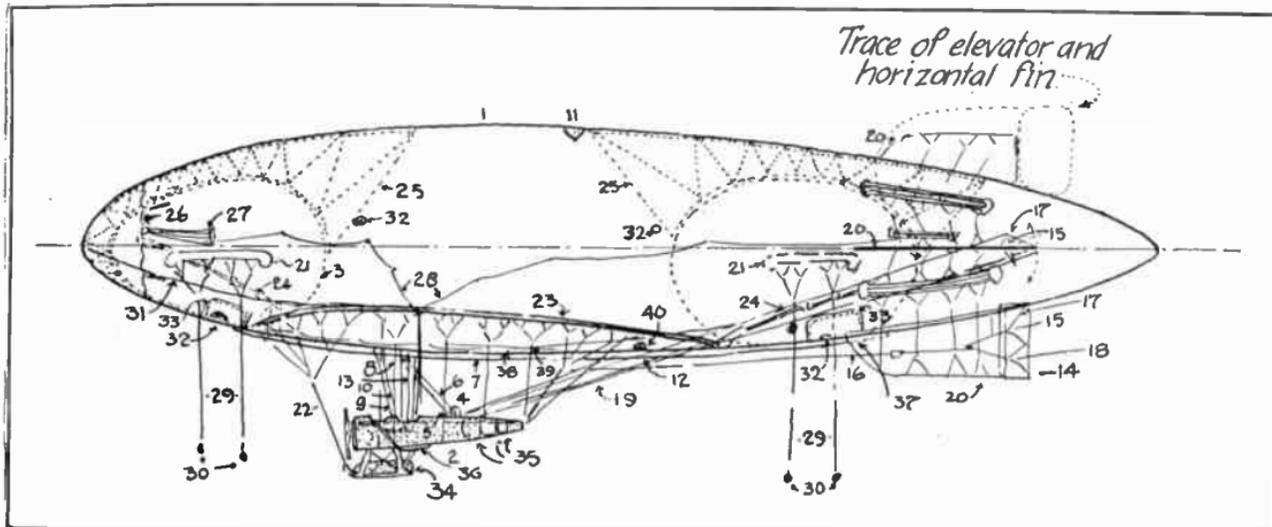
FIG. E. GENERAL ARRANGEMENT PLAN FOR NEW NAVY "BLIMPS"
